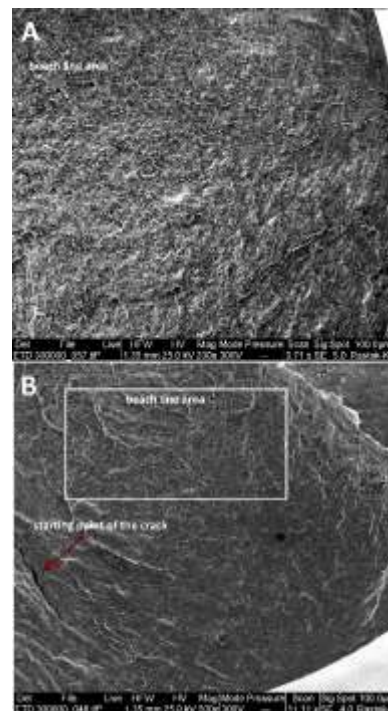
Scanning electron microscope image of fatigue failure surfaces a) R3800 and b) R5200.
